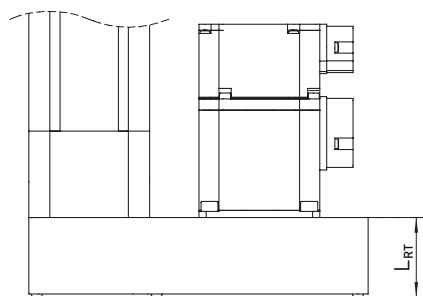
Motor connection of linear modules HM-S with belt drive
